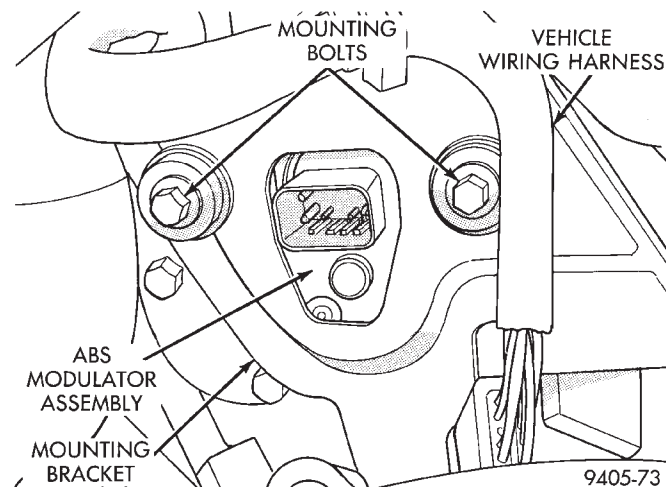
Front Modulator Assembly To Bracket Bolt
